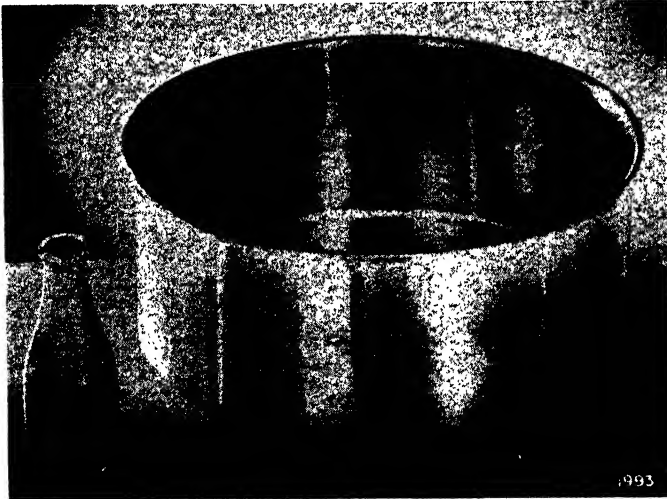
A TANK FOR A BOTTLE-FILLING MACHINE, SPUN FROM 16 GAUGE 18/8 STAINLESS STEEL
